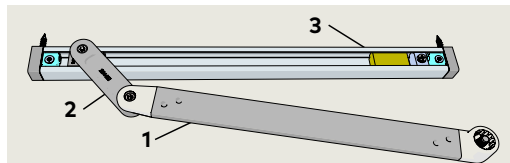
T – Splined pull arm assembly, 0 - 1" reveal
